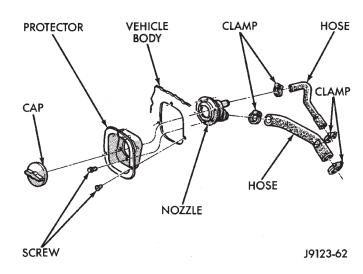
Fuel Filler Cap, Protector, Nozzle and Hoses
